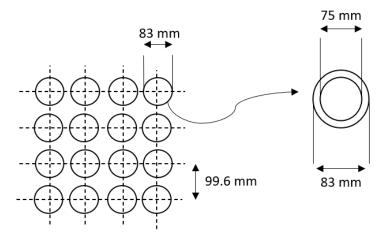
The square arrangement selected for the tube layout with tube and pinch dimensions (Fogler, 2006)
